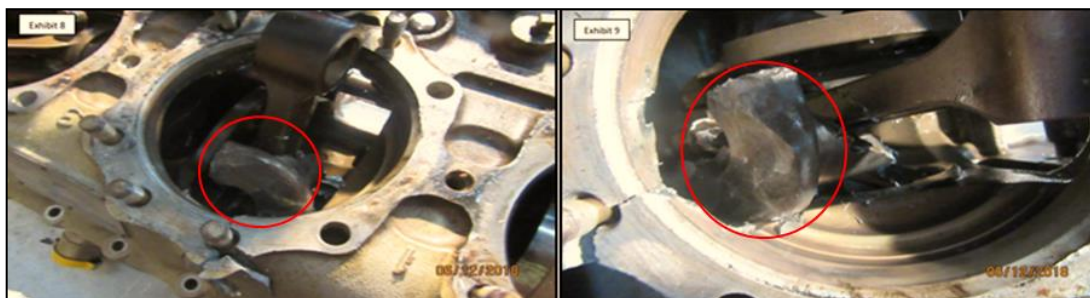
(left) and Photo No. 8 (right): Detached section of crankshaft
